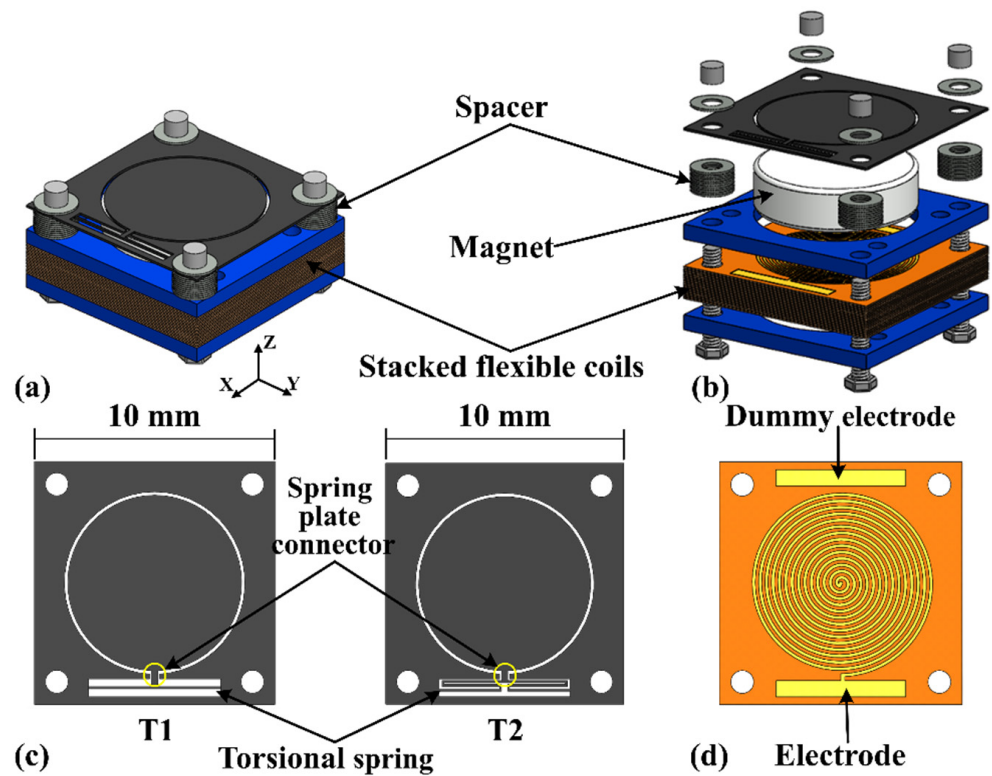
Schematic and exploded illustration of the assembled EVEH. (a) schematic illustration of the EVEH device; (b) exploded view of the EVEH device; (c) two types of torsional spring; (d) a layer of flexible coils.
